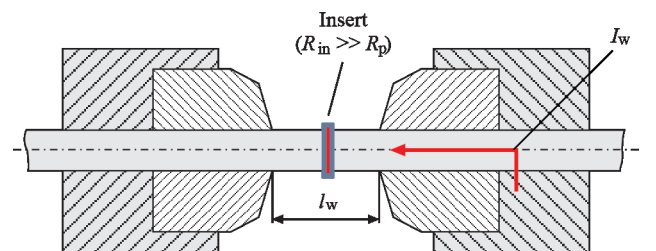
Scheme of the resistance heating process through an intermediate insert in the current-carrying clamps of the machine for FBW (l_w — tolerance for welding)
